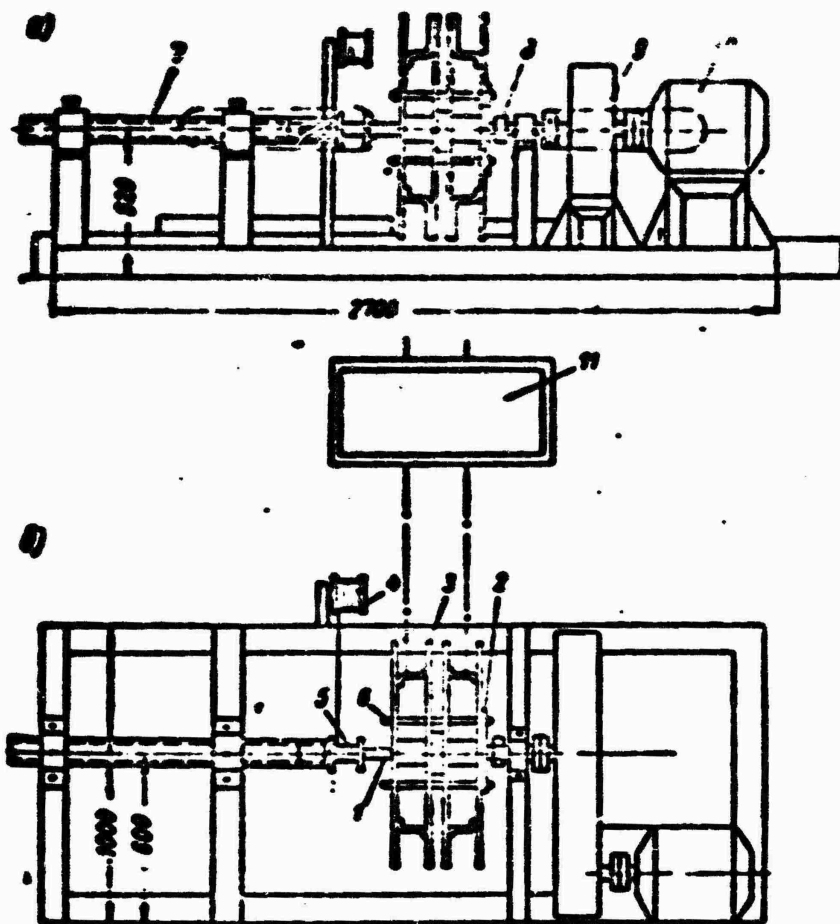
Machine for winding of wire onto the reels. 1) Shaft; 2) rotor; 3) reel; 4) bracket-supported drum; 5) shaft-supported drum; 6) bolt; 7) removable pipe; 8) hinges; 9) reducing gear; 10) electric motor; 11) sand.
